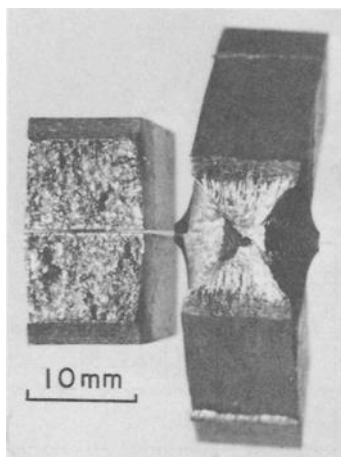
Typical examples of fracture surfaces of solution-treated and 2-mm V-notched 26Cr-1Mo steel specimens broken at -40°C .
